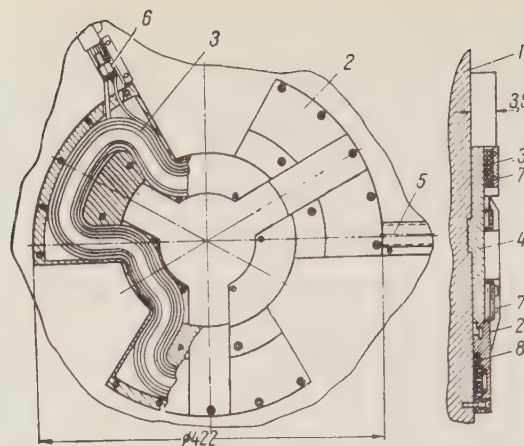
Central correcting coil. 1) Accelerating chamber cover; 2) coil form; 3) copper tube coil; 4) central disks; 5) copper shield; 6) detachable vacuum coupling; 7) tubes for water cooling of form; 8) clamping plate.
